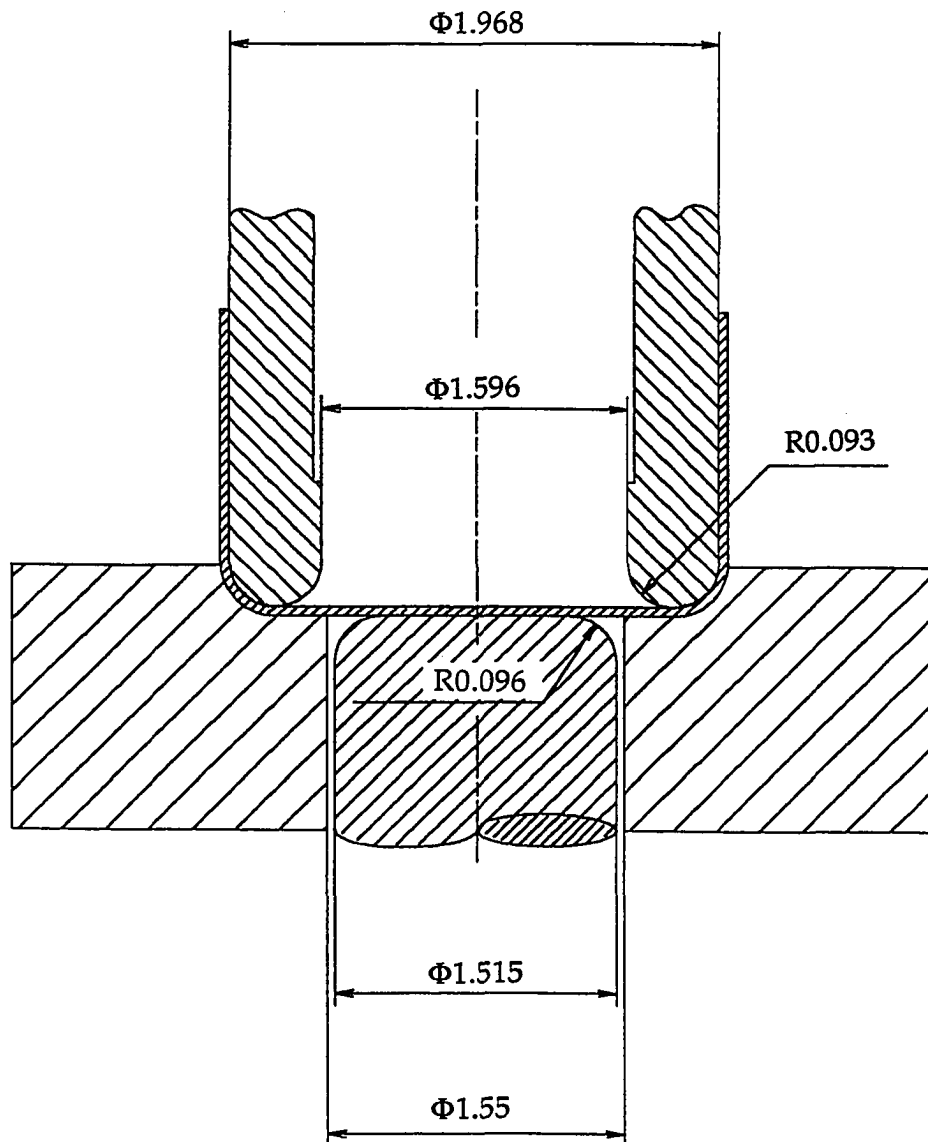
Geometry of the tooling used in the 2nd stage (reverse redrawing) operation.
